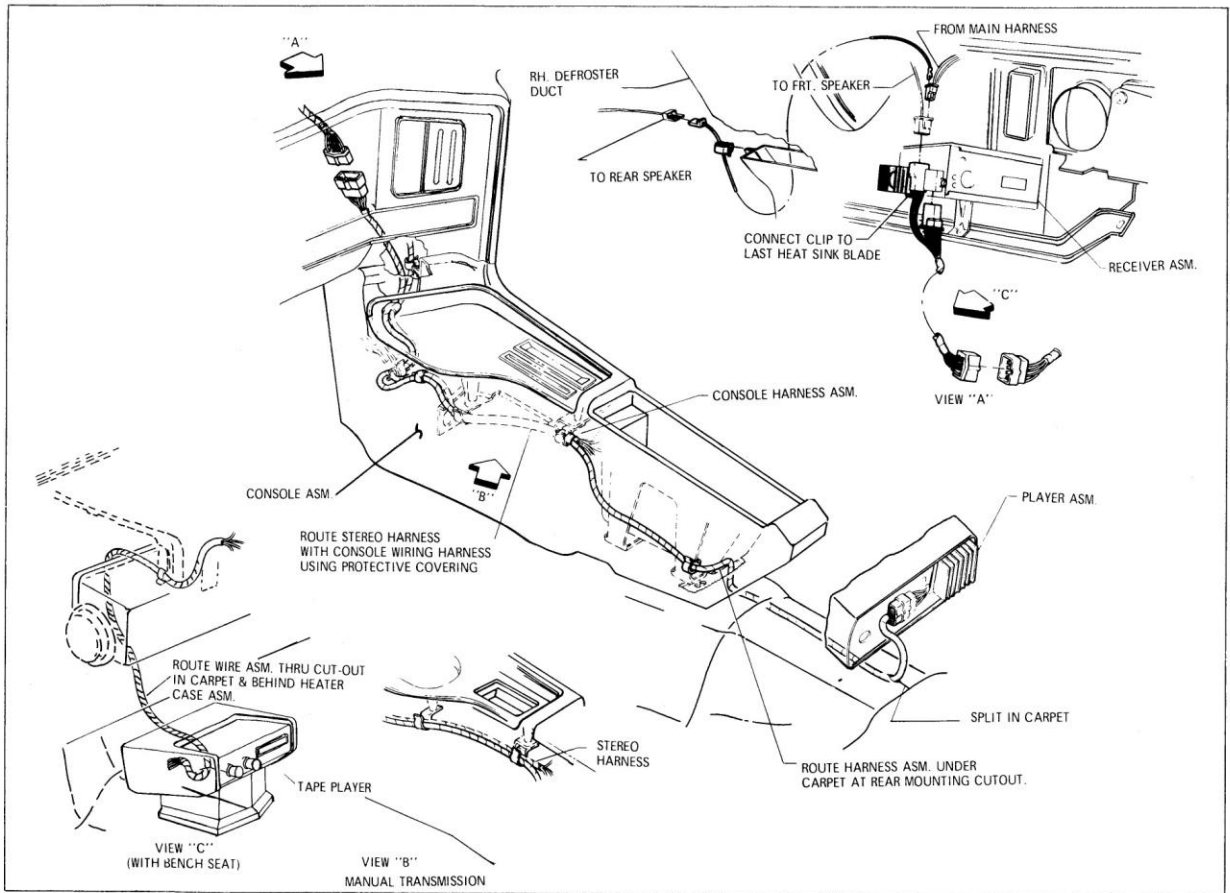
Grand Prix Stereo Tape Player Wiring
